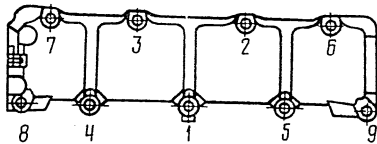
Camshaft Bearing Housing Nut Tightening Sequence
